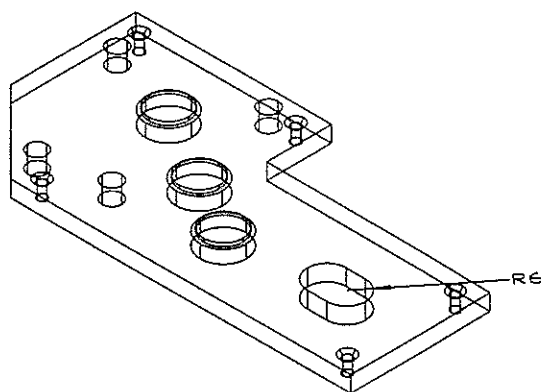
Original solid hidden, dimension of mirrored solid modified, and solid updated
